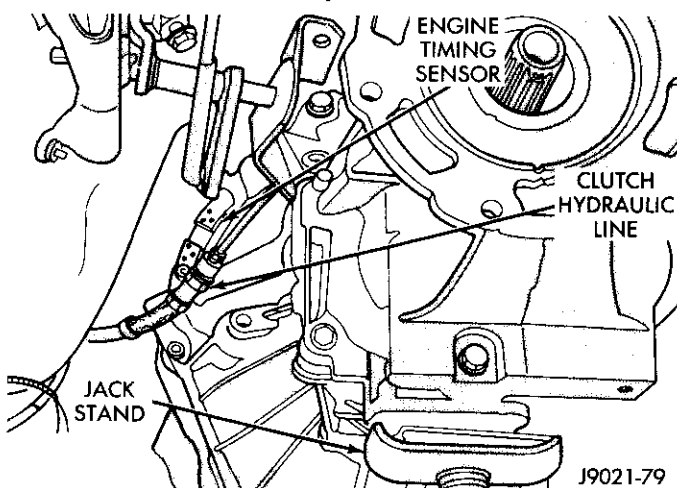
Timing Sensor And Clutch Hydraulic Line Location
